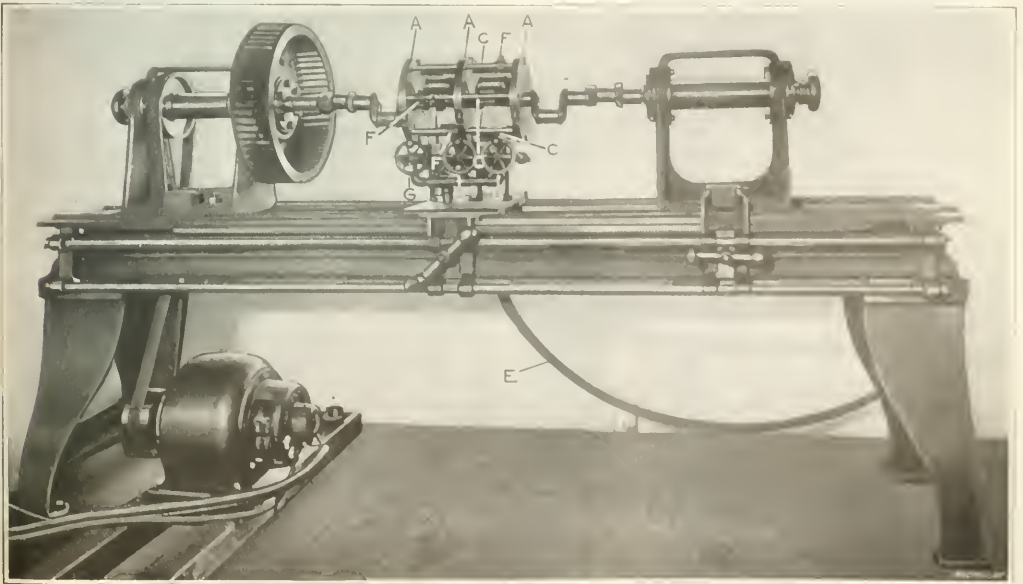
Dynamic Balancing Machine engaged in balancing Crankshaft and Flywheel of Six-cylinder Motor
